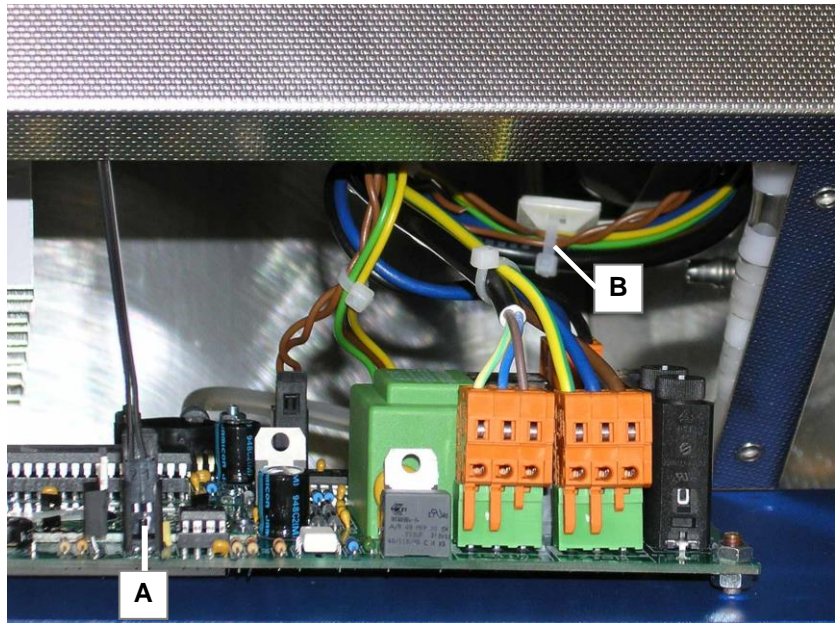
Pull off the LED connection cable – cut the cable clip
